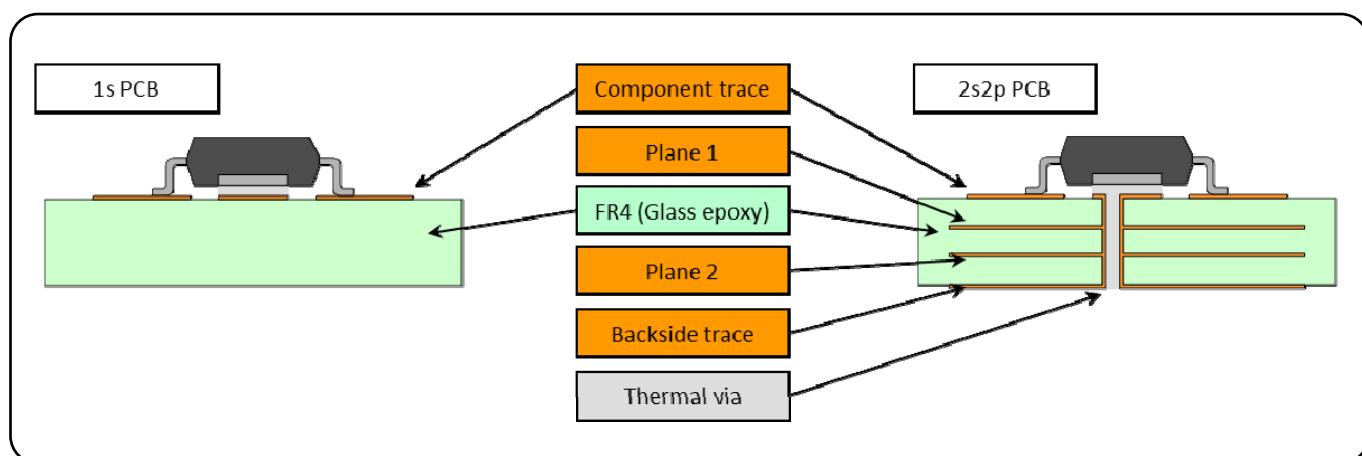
Sectional view of the thermal test board (SMD with heat sink)
